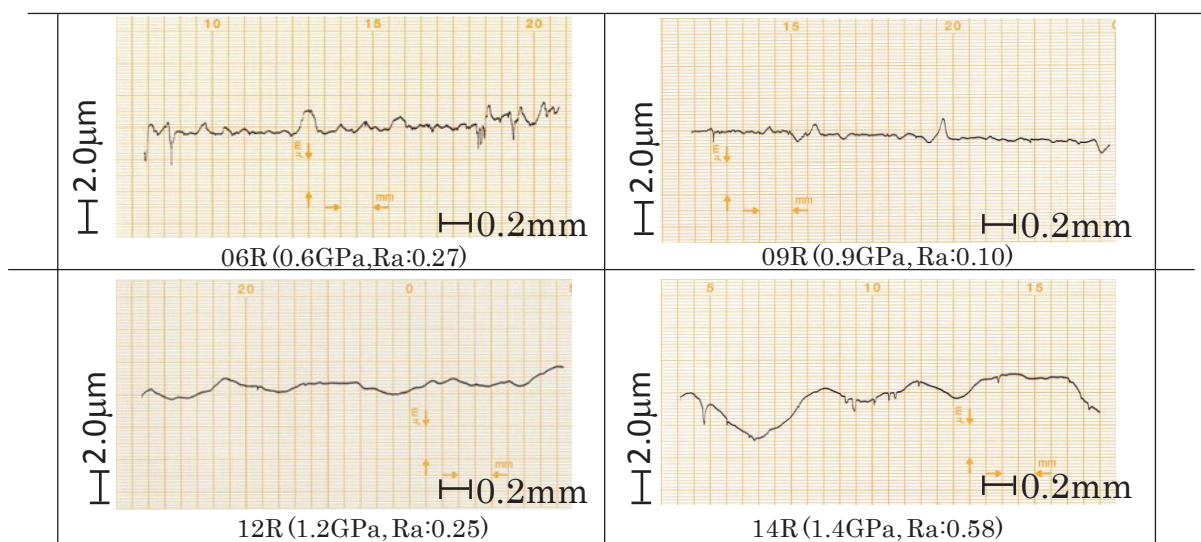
Surface roughness on cross-section of the rolling contact surface of each test piece after test.
